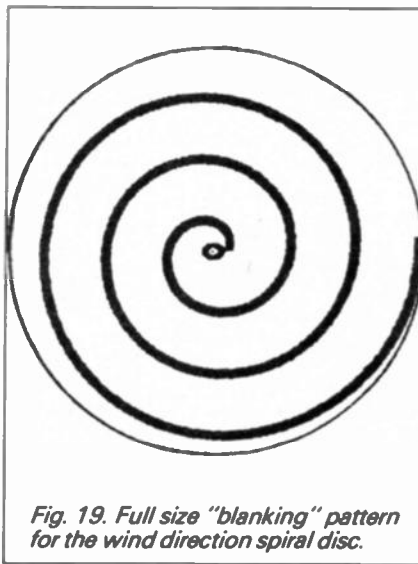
Full size "blanking" pattern for the wind direction spiral disc.
